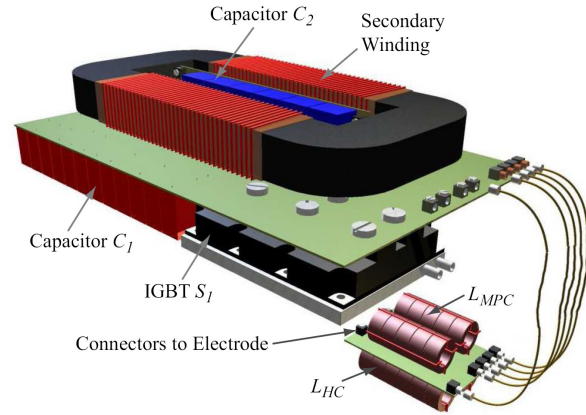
3D mechanical drawing of the solid state modulator – Dimensions: 50 cm  $\times$  30 cm  $\times$  12 cm.
